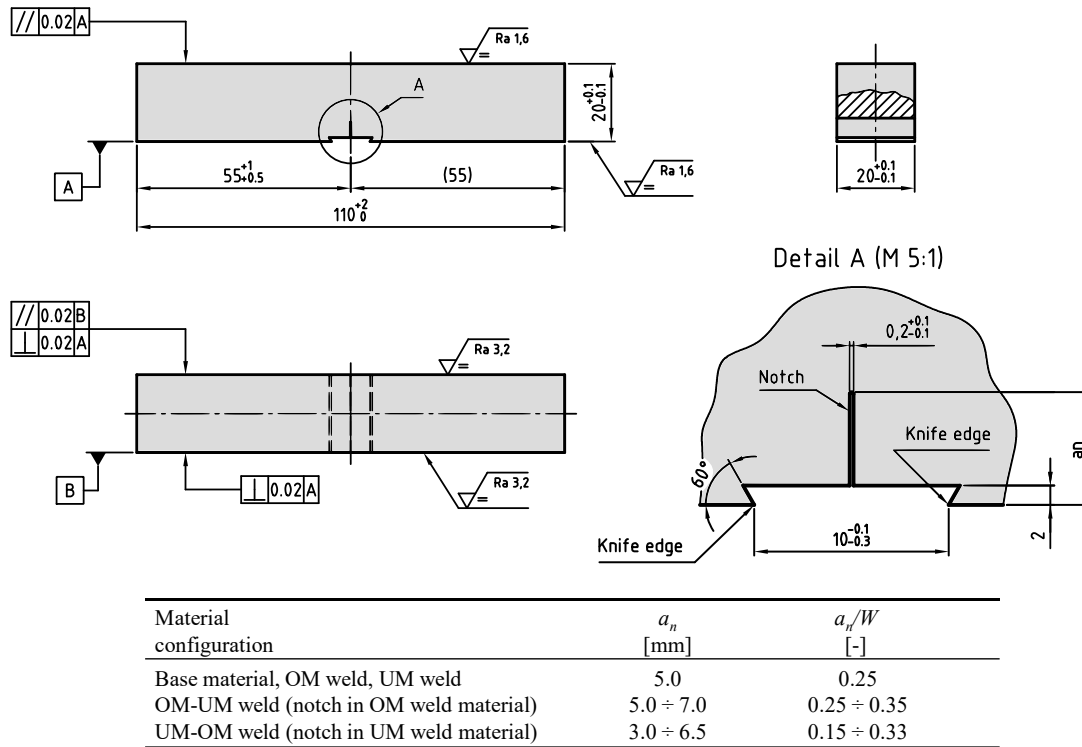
The geometry of the fabricated SE(B) specimens.
